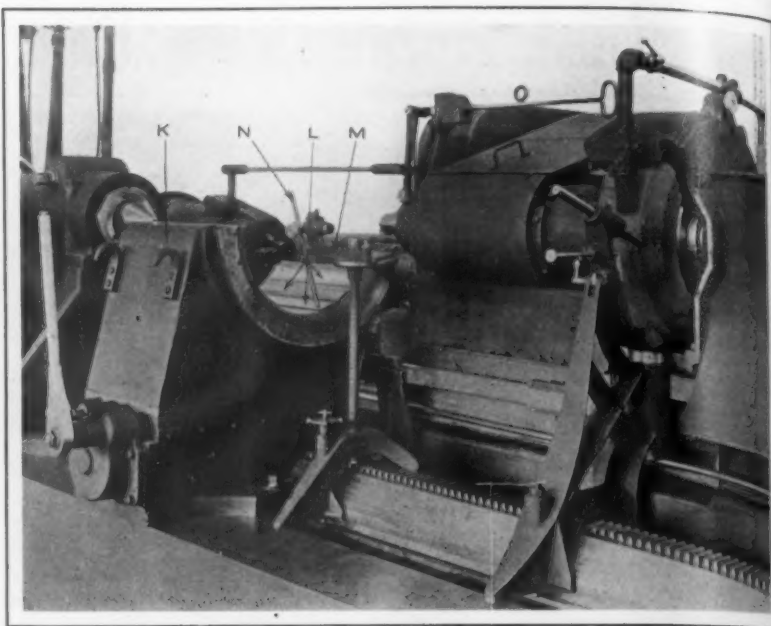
The Pillow Block Bearings with Trammel for Setting the Bronze Sleeves for Corner Diameter and Radial Truing Device for Shaping the Corner of the Grinding Wheel for Grinding Fillets
